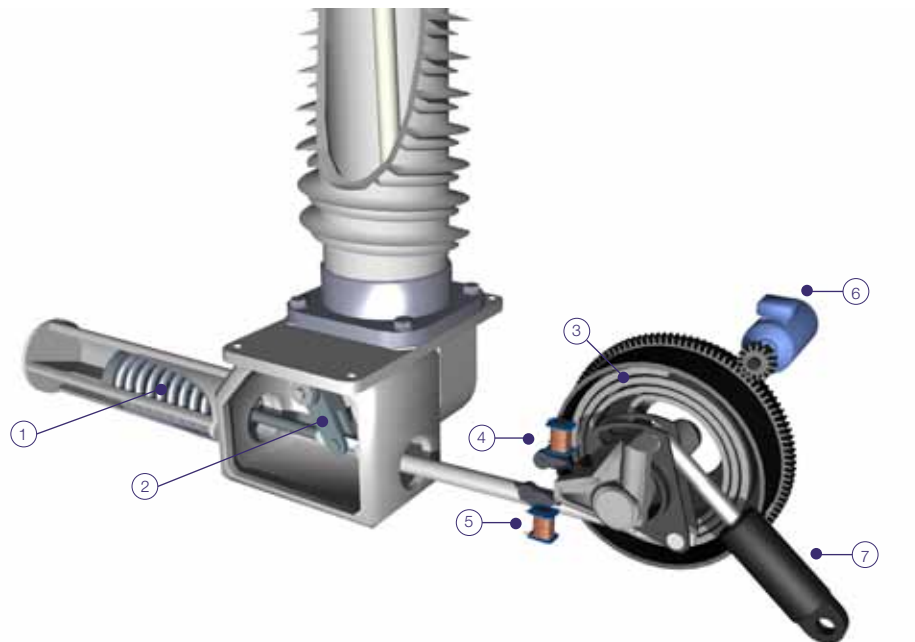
Spring operating mechanism with clock spring. ABB type BLK.
